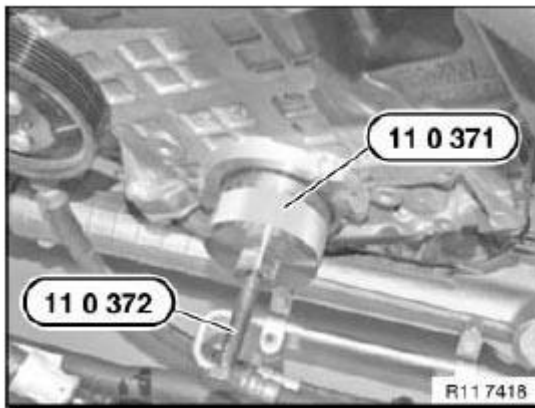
Screwing Special Tool (11 0 371) Into Crankshaft Seal
